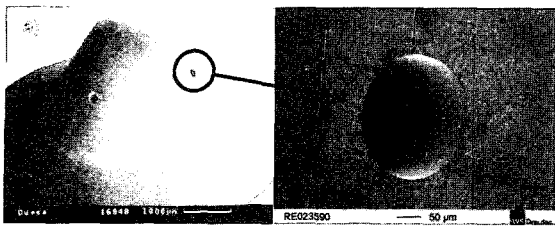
Nozzle of an injection mold machined with a picosecond laser (Source: R. Giedl, GFH)
